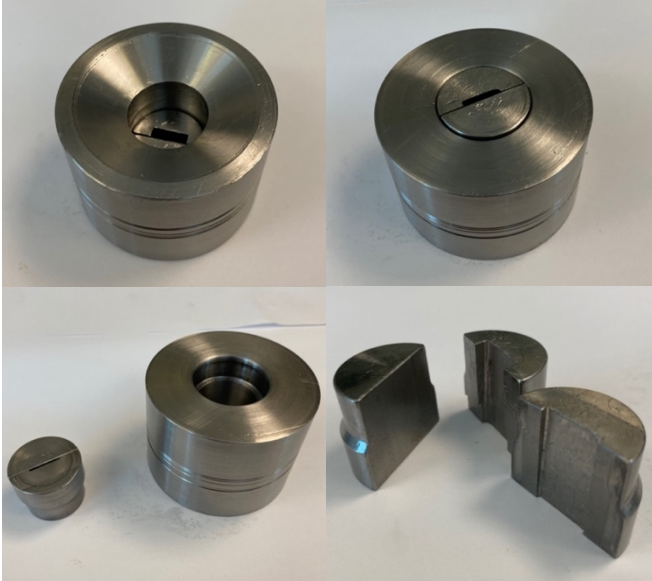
Tapered discs used for pressure testing and filter cake removal.
